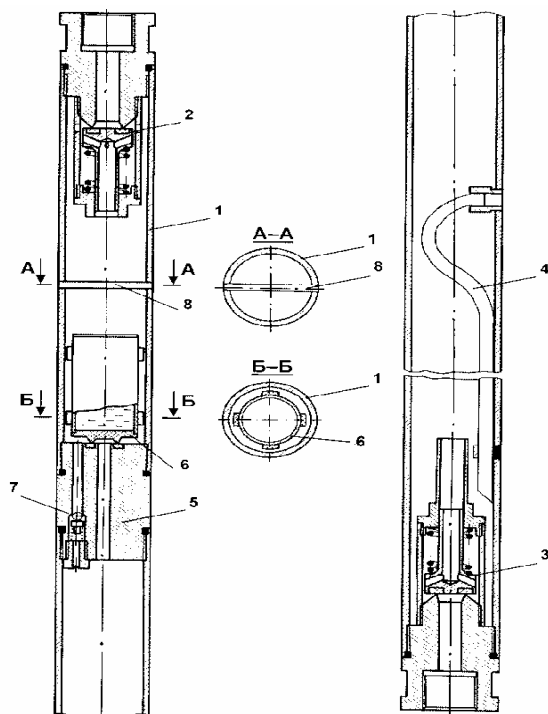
The sectional gas collector SG-76P. 1 – corpus; 2 – upper valve; 3 – lower; 4 – a siphon tube; 5 – a valvular box; 6 – a float valve; 7 – a reducing valve; 8 – terminator
